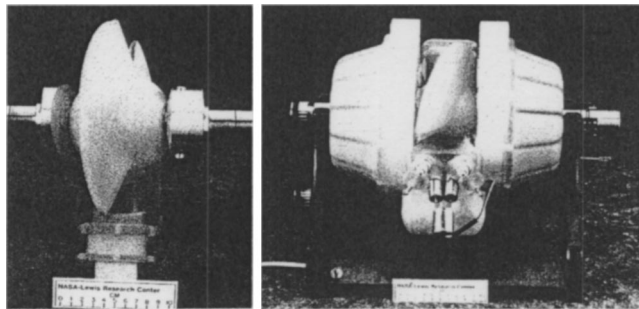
Rapid-prototype models of the Meyer engine crankshaft and one-disk engine arrangements
